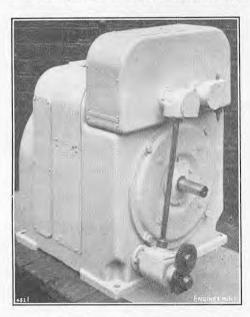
Bench-Mounted Spot Welder; Sciary Electric Welding Machines, Limited.
